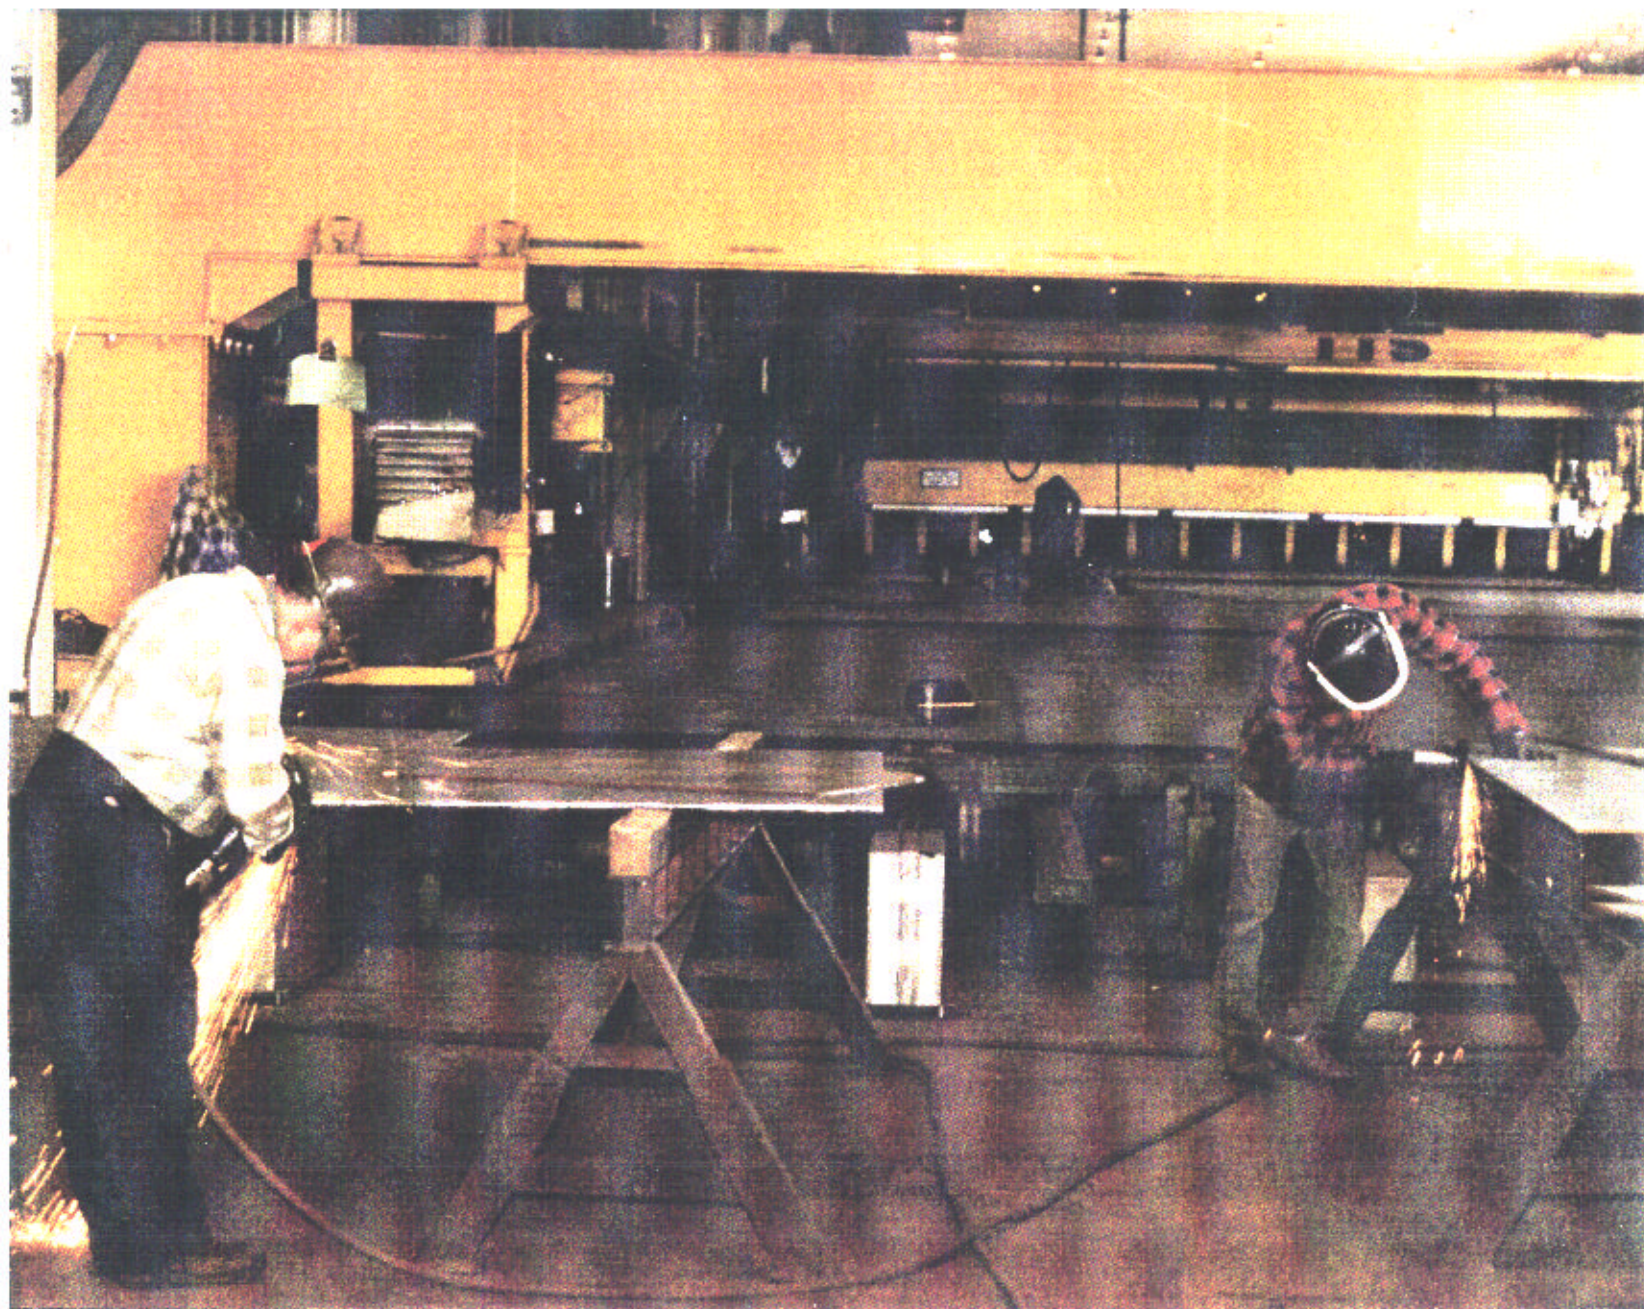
Manual grinding of plate edges prior to butt welding
